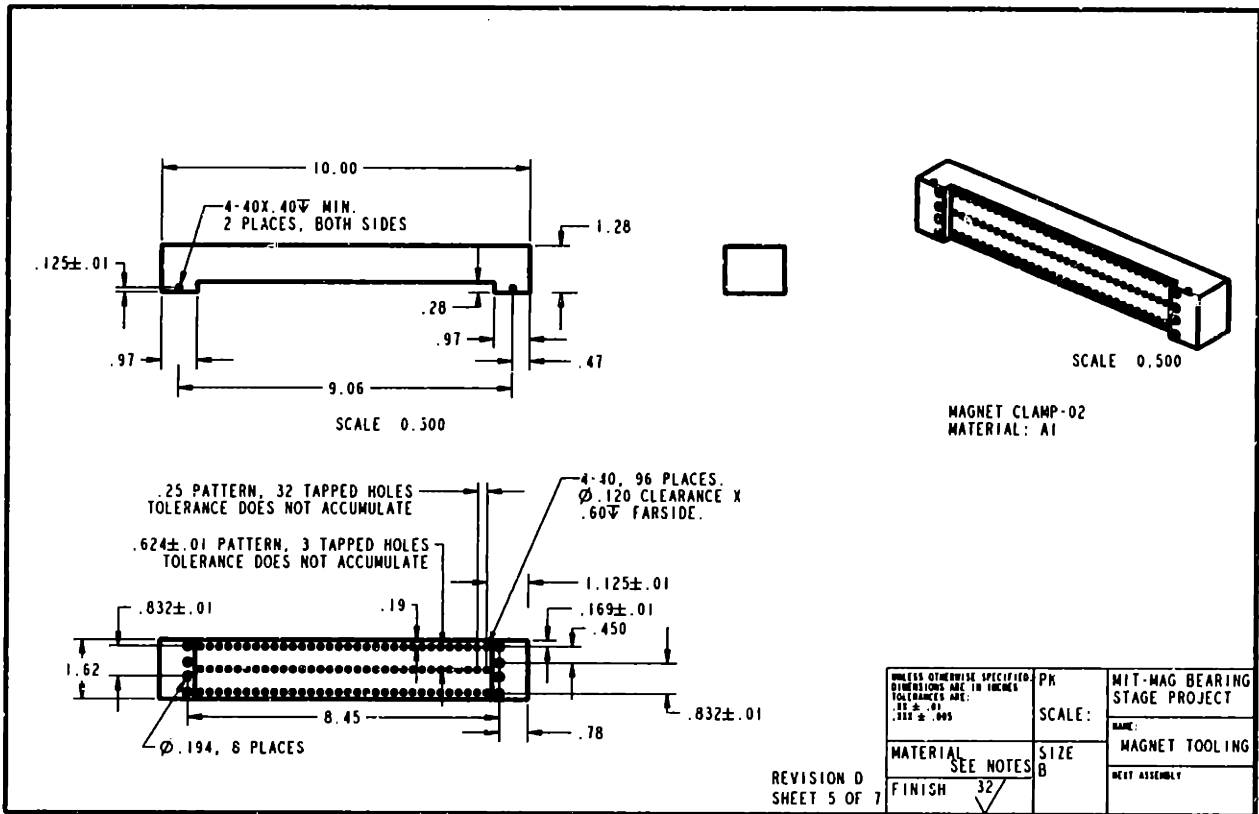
Tooling for assembling the prototype magnet array, continued II
